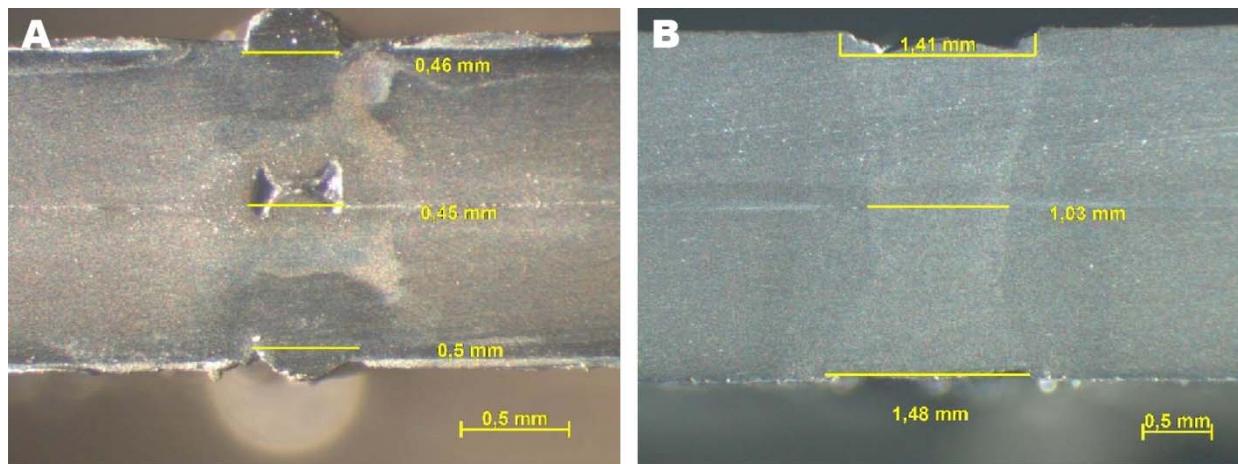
Cross sections showing the weld seam for 1.25 mm thick zinc coated steel, processed using a fiber laser without a gap between the sheet and at a feed rate of 3.3 m/min. A) Conventional laser focusing creates a seam with voids, and B) the FL-ARM creates a weld seam with excellent uniformity and no porosity.
